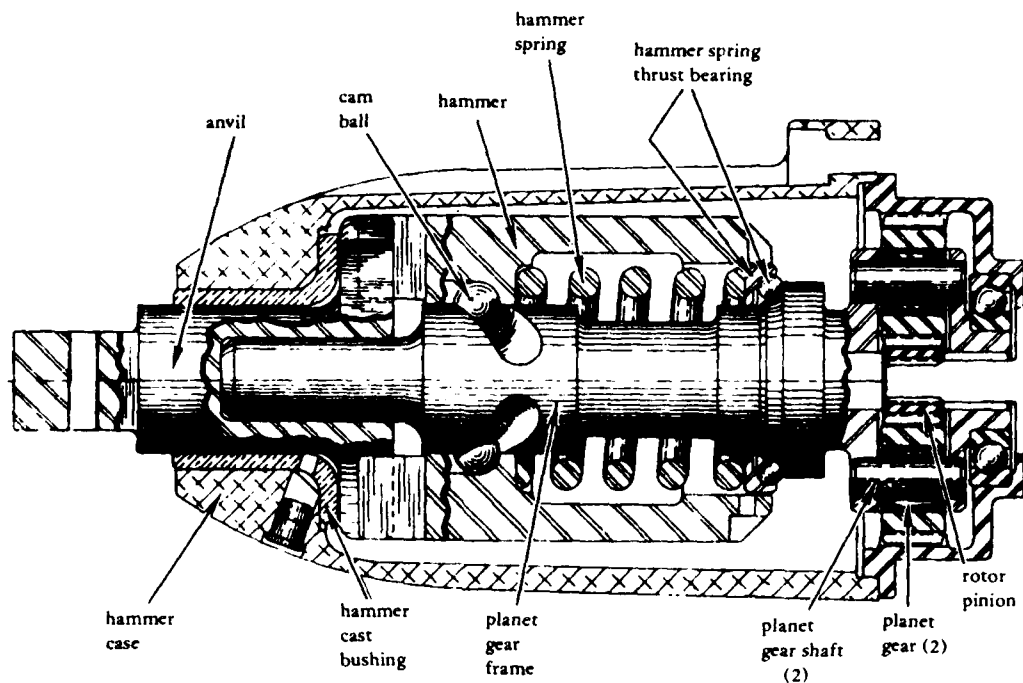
Ingersoll-Rand's Model 5100 impact mechanism as configured on presently used oil-hydraulic tools.
